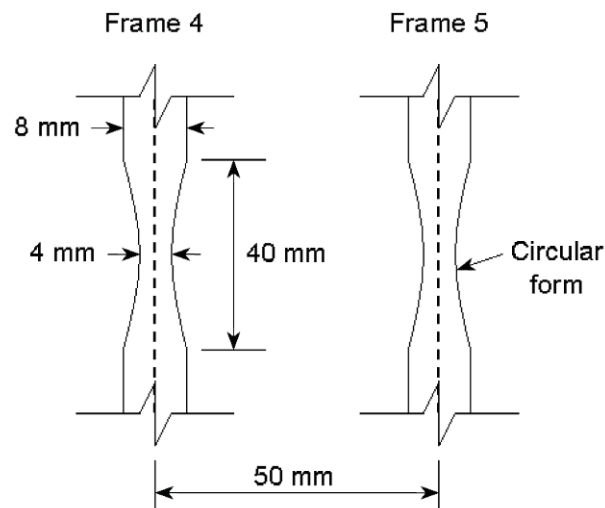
Long Cylinder Simulated Flange Corrosion.
